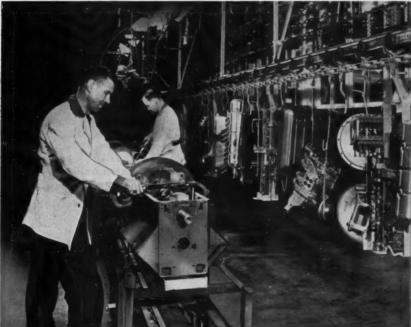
(Left) Engine is assembled in a pressurized, dust-proof room that is maintained at temperature of 70 degrees F. Parts conveyor at right is synchronized with assembly line.
